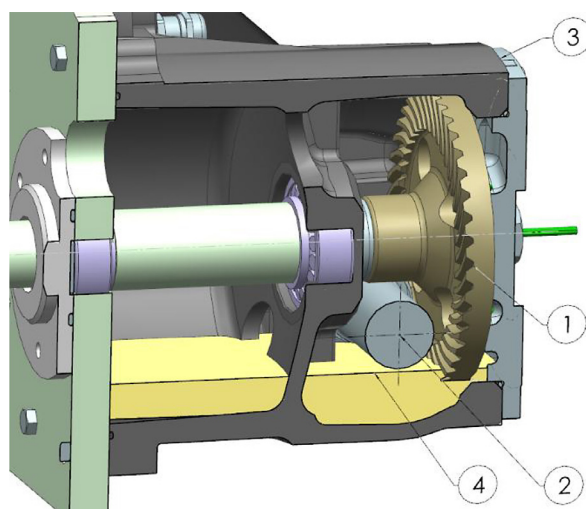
Spiroid gear: 1 – disc wheel, 2 – worm, 3 – gear housing, 4 – oil
